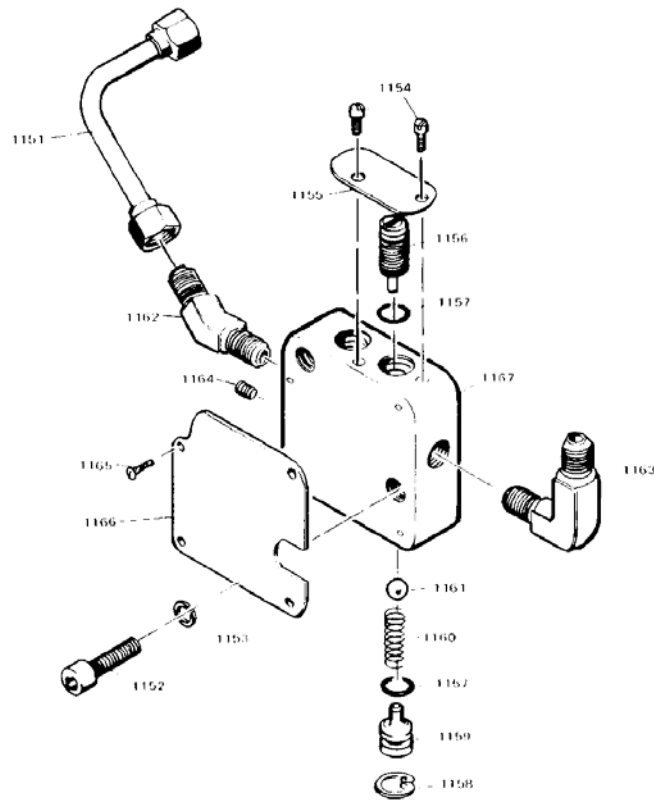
Exploded View of Vane Servo Timing Valve Assembly (External Type)
